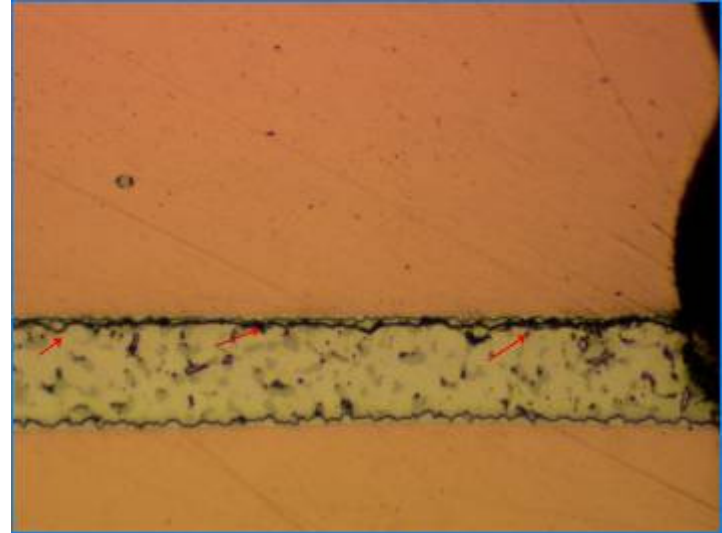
cross section, SN79, U28, left lead solder crack, 400xc
